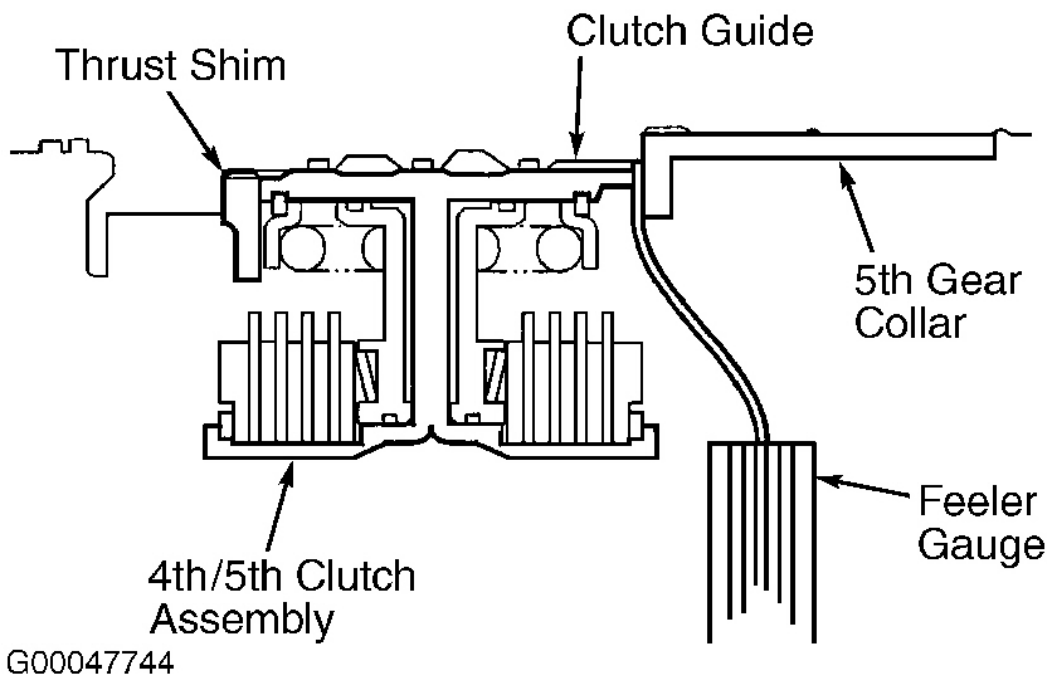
Measuring 4th-5th Clutch Assembly Clearance
